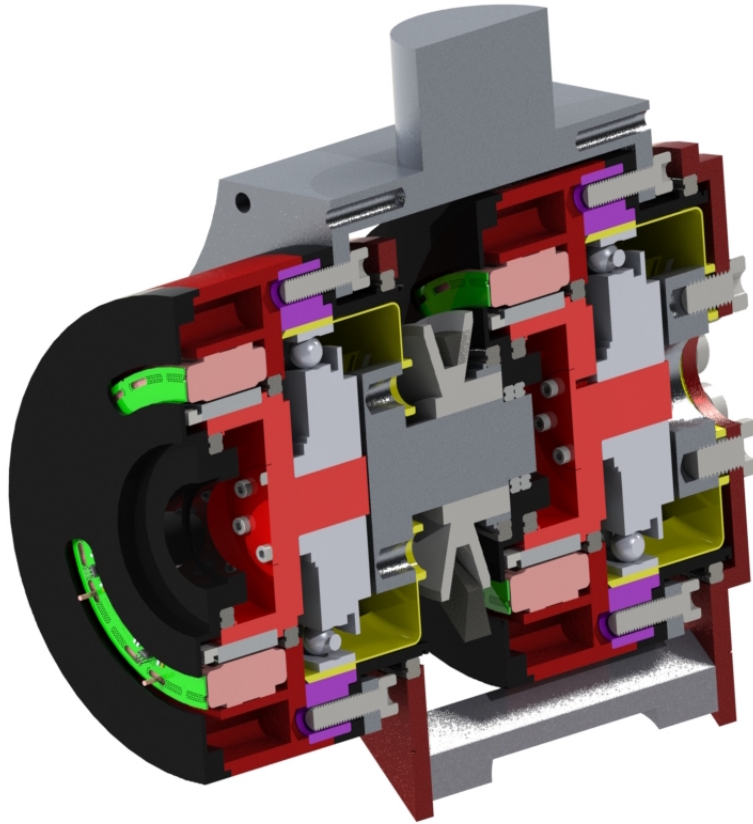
Cross-sectional view of 3D CAD rendering of hip joint
